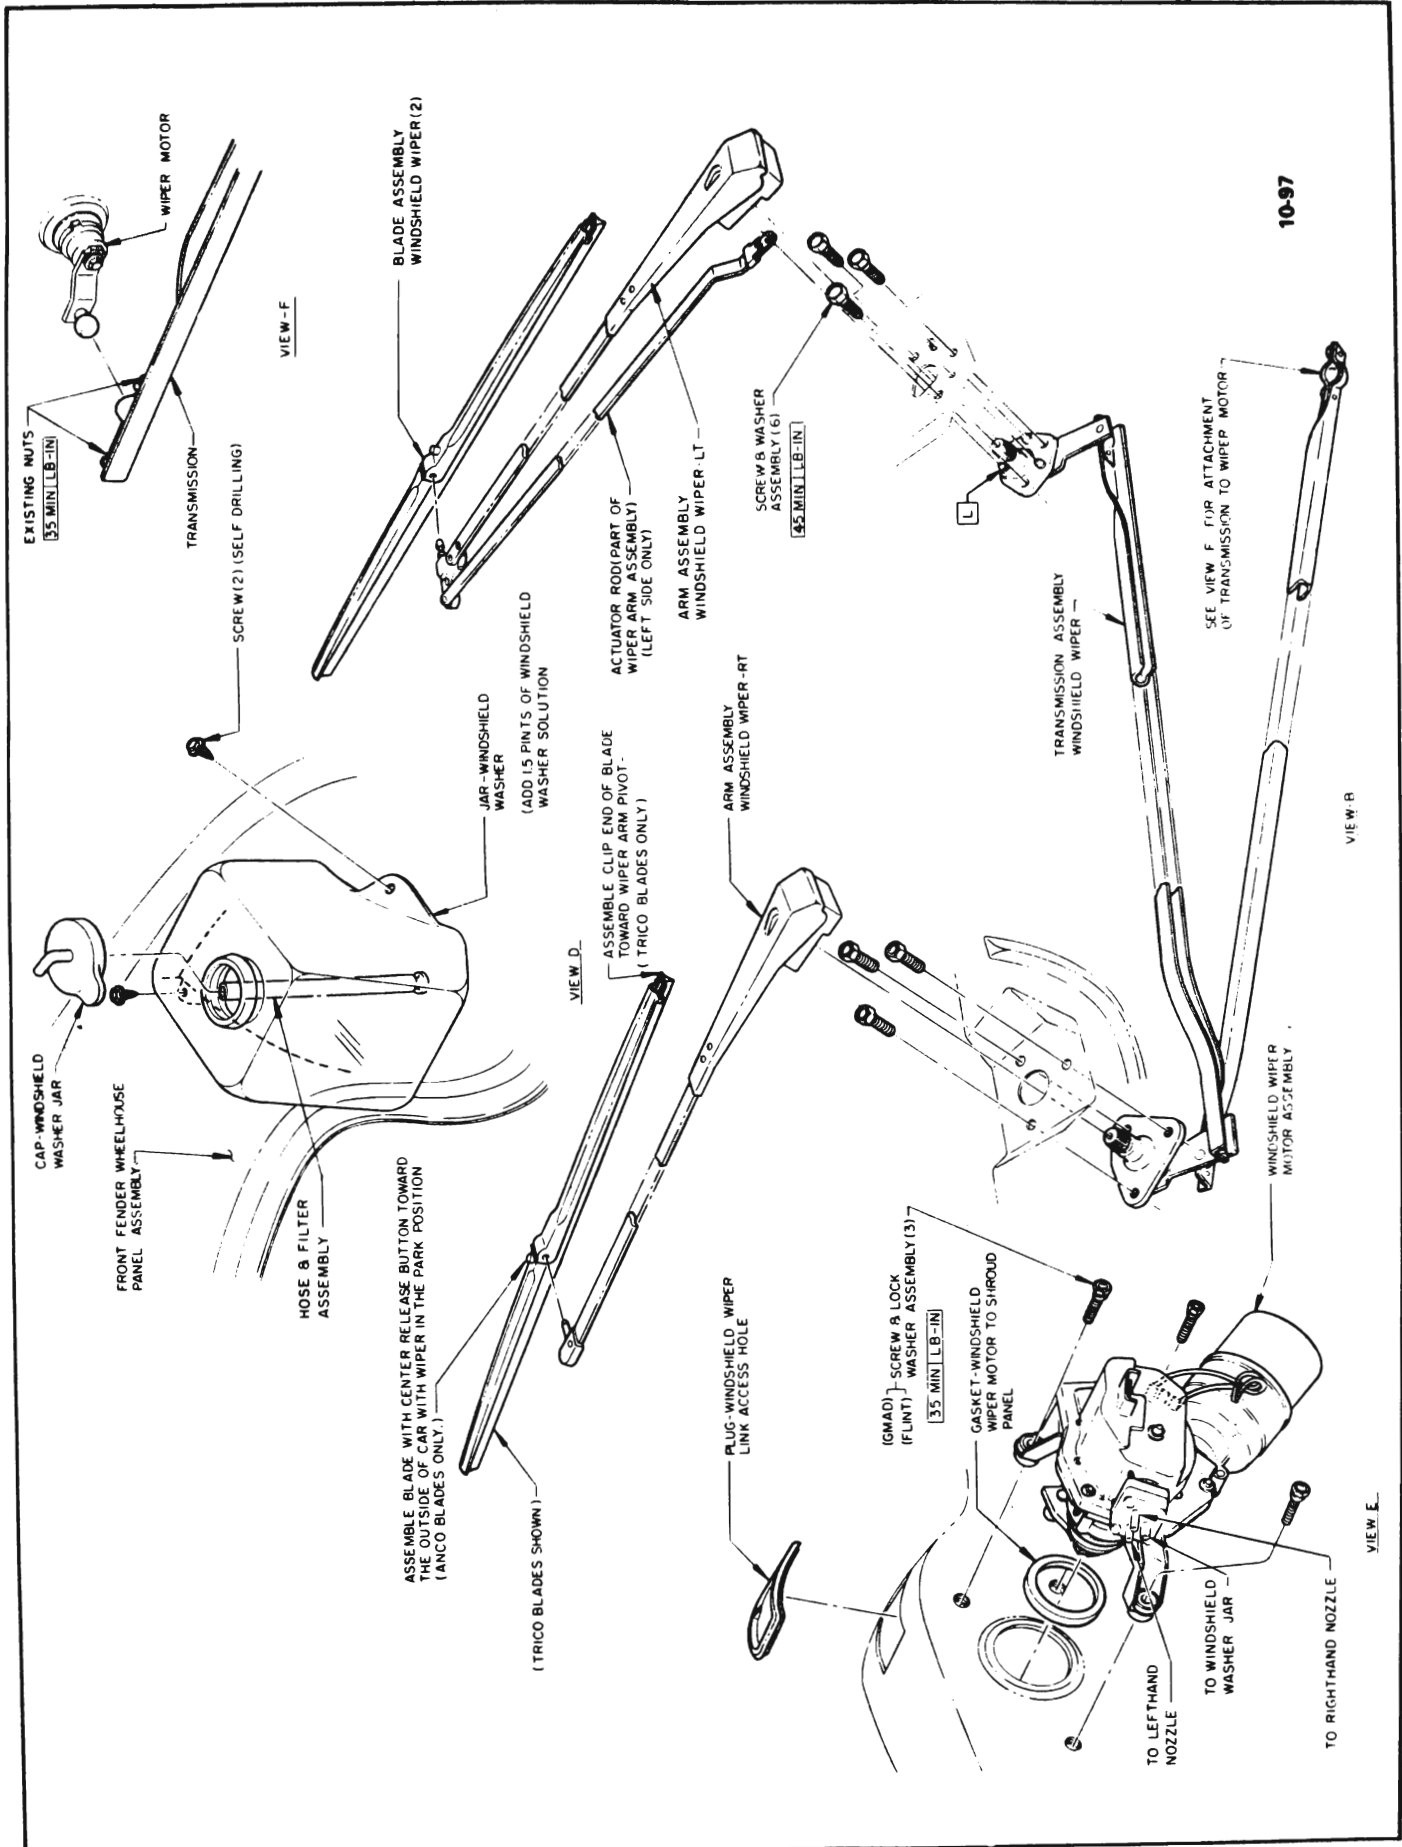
Wiper Motor, Linkage and Arm Installation 43-44000
